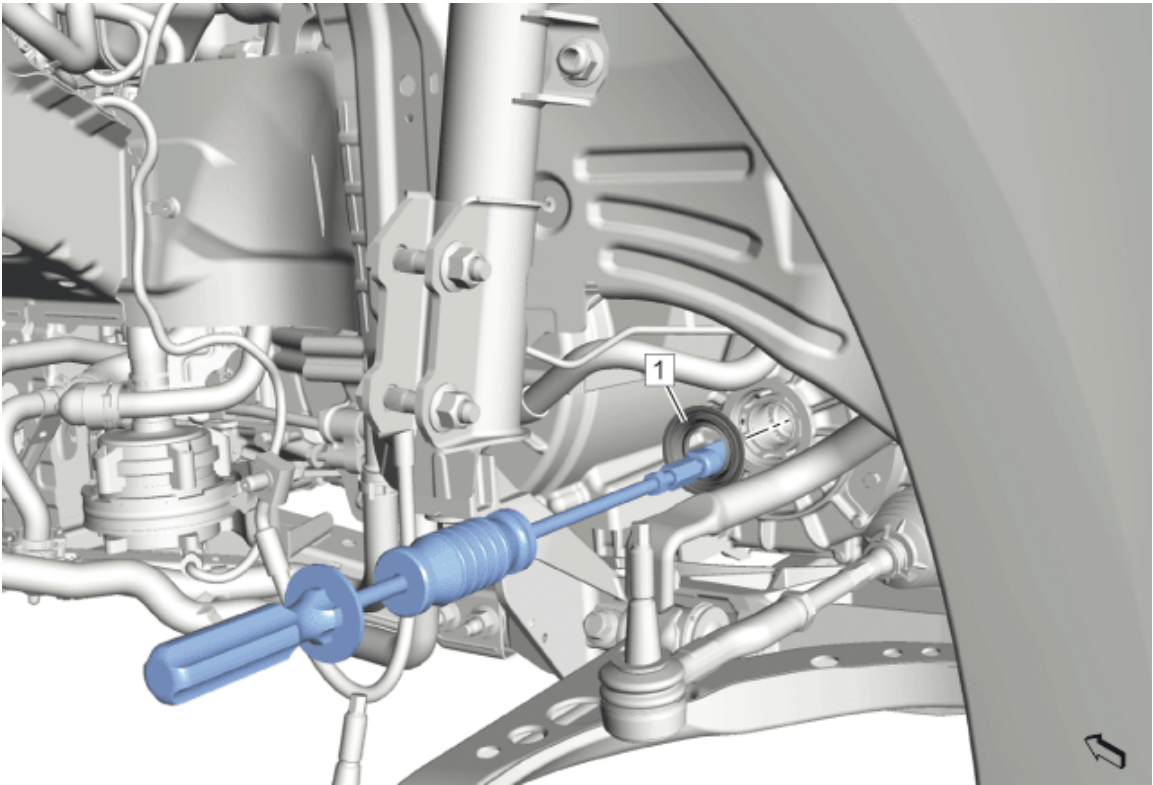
Front Wheel Drive Shaft Seal - Left Side
